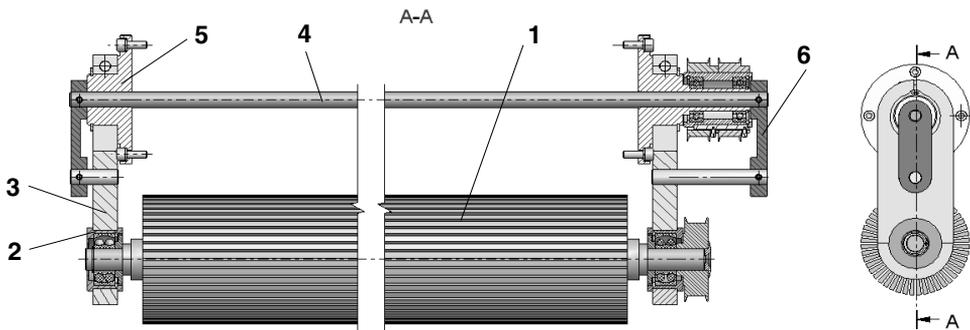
Rotational brush unit: 1 – rotational brush, 2 – bearings of the brush, 3 – extension arm, 4 – torsion bar, 5 – element joining the unit, 6 – arm of the driver
